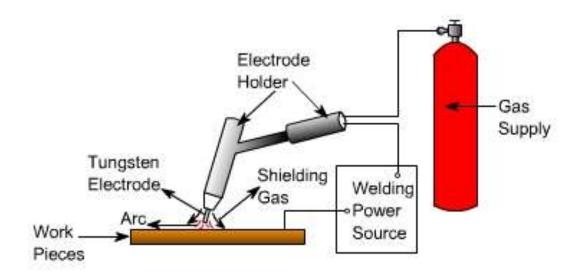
Schematic Diagram of TIG Welding System. [Ref: 1]
